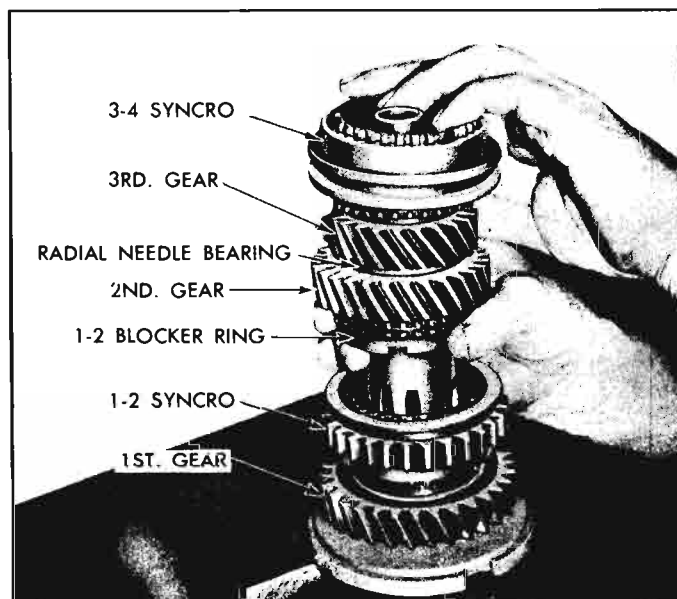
D-45—Installing Second Gear, Third Gear, and 3-4 Synchronizer on Mainshaft
